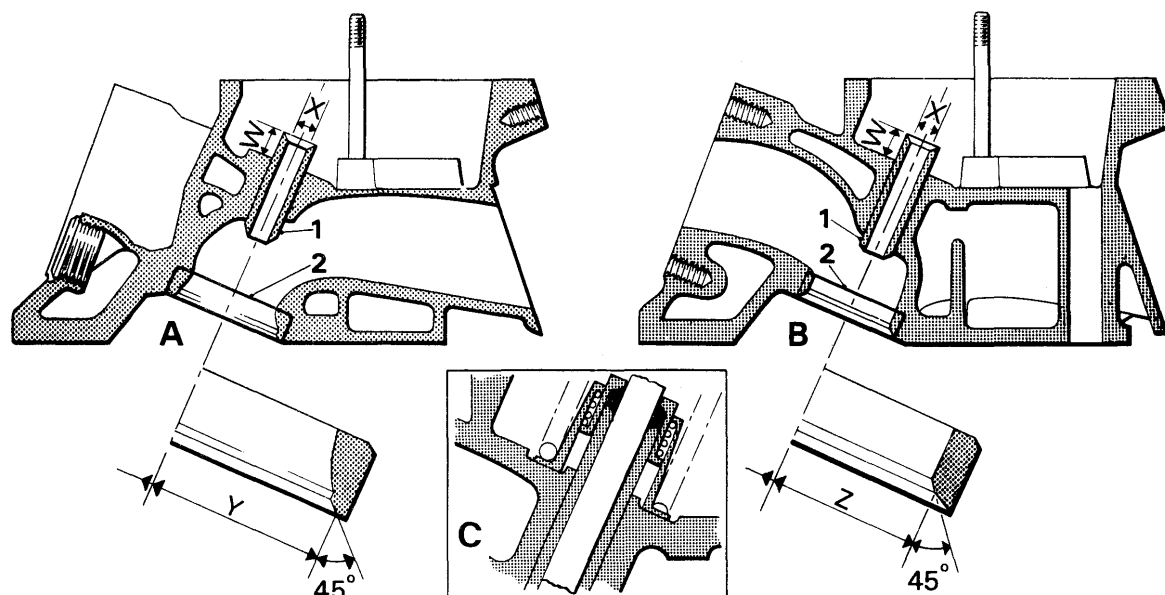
INLET AND EXHAUST VALVE GUIDE AND SEAT DIMENSIONS
